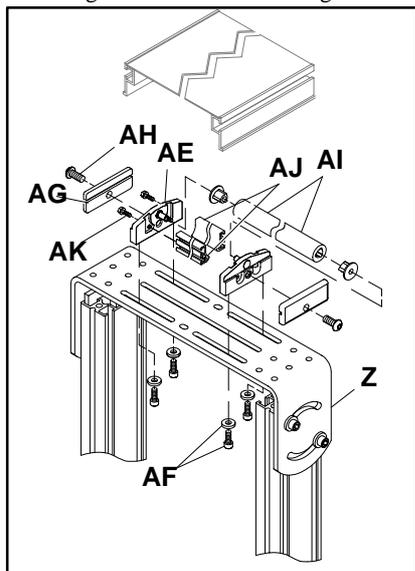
Mounting Bracket with Return Roller Assembly used with a Flat-Belt Conveyor (610 mm and Narrower)
